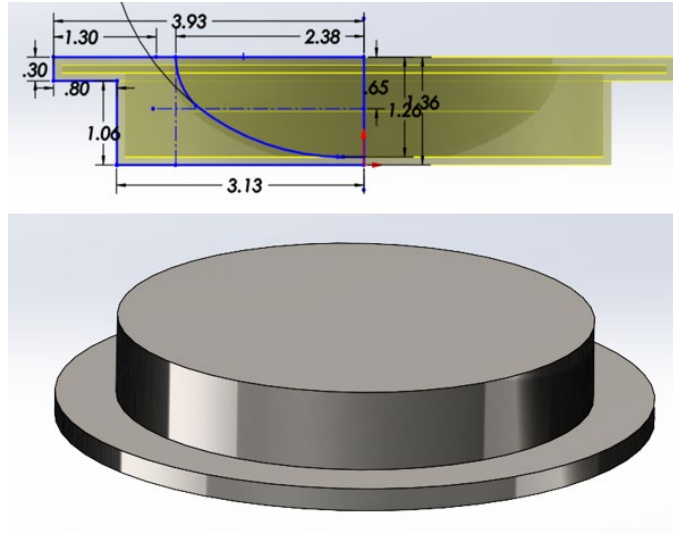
Heat Shield Top CAD Drawings Side Sketch (top) and Outside View (bottom).
